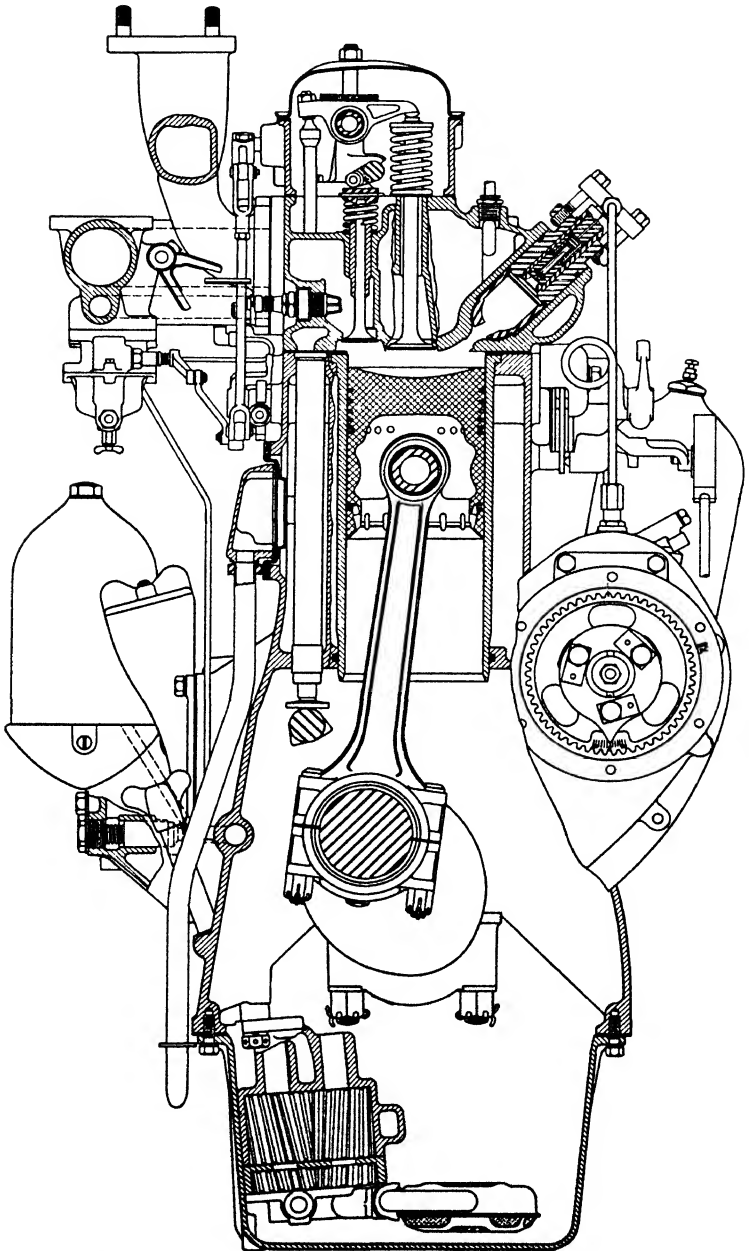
CROSS SECTION OF I.H.C. DIESEL ENGINE.
